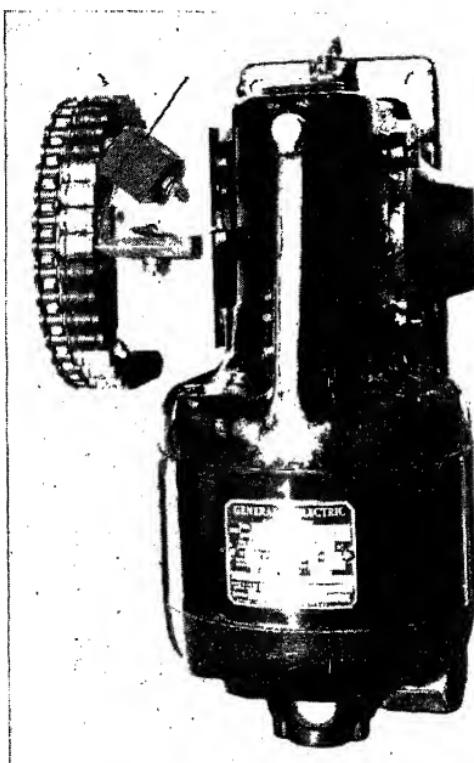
B.—Motor-driven timing chain for seam-welding.
